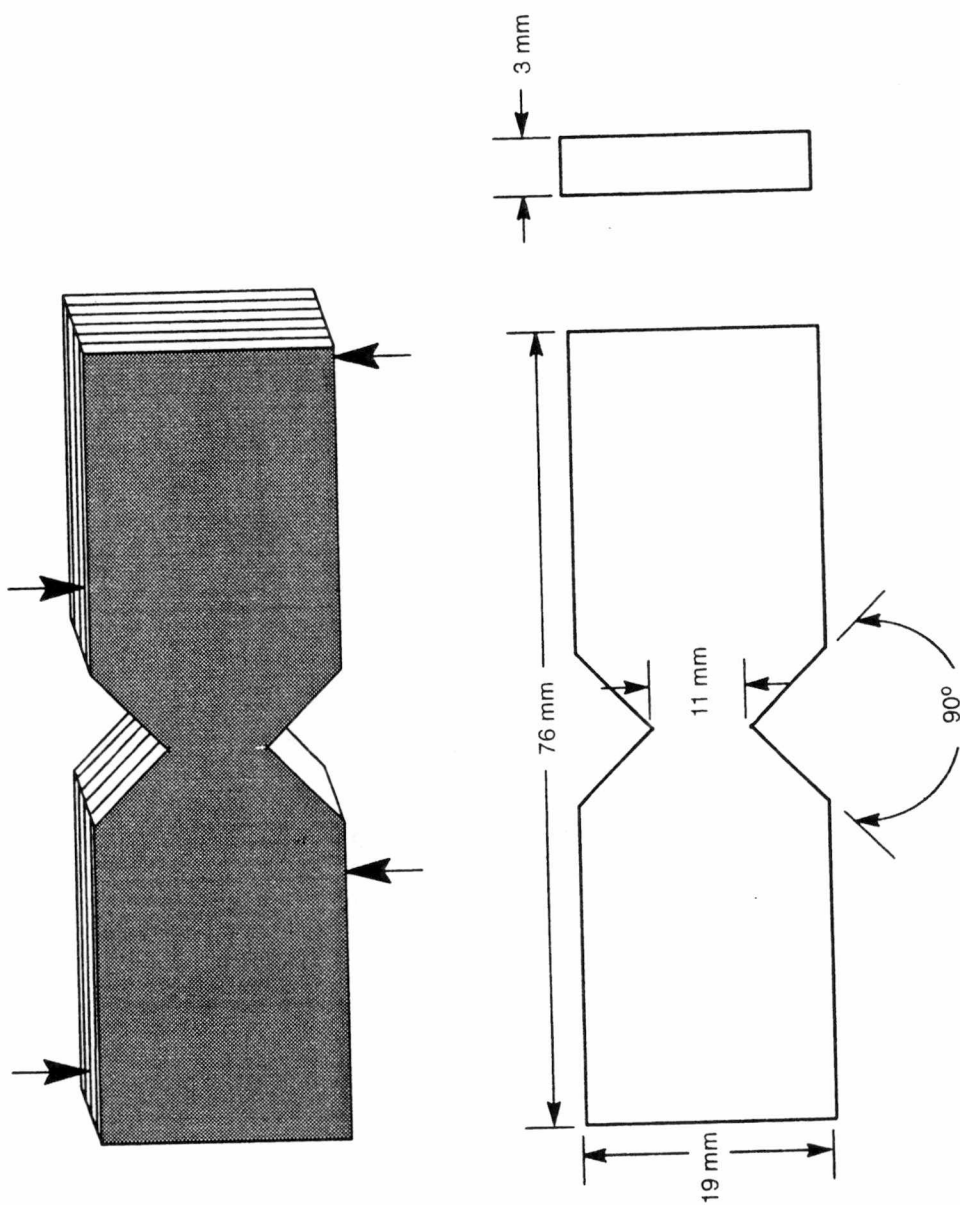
Schematic of specimen dimensions and testing configuration for Iosipescu in-plane shear tests (49).
